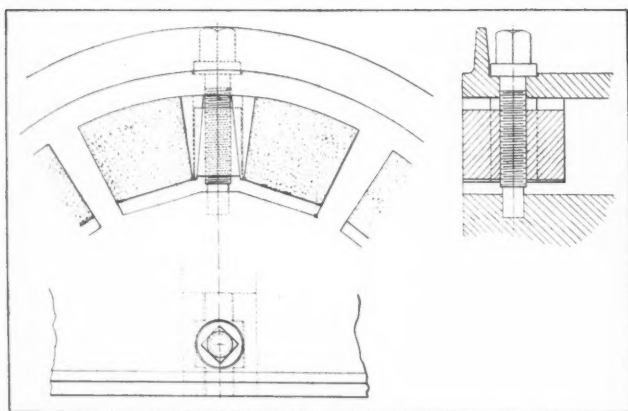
Chuck with Screw and Wedge Fastening Arrangement which Tightens as Wheel Rotates
